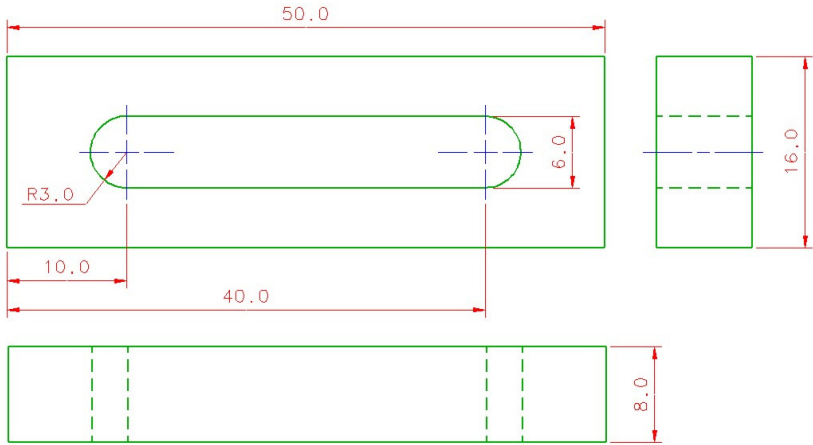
Mechanical component geometry and dimensions, in millimeters.
